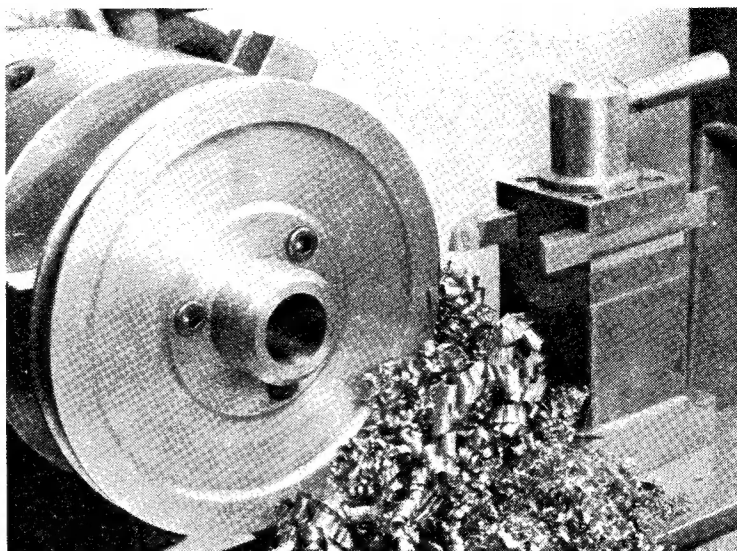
Machining the pulley groove with two tools mounted in the rear toolpost
